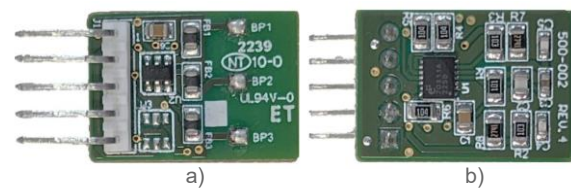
Proximal End views. a) Top view of the PCBA. b) Bottom view of the PCBA.
